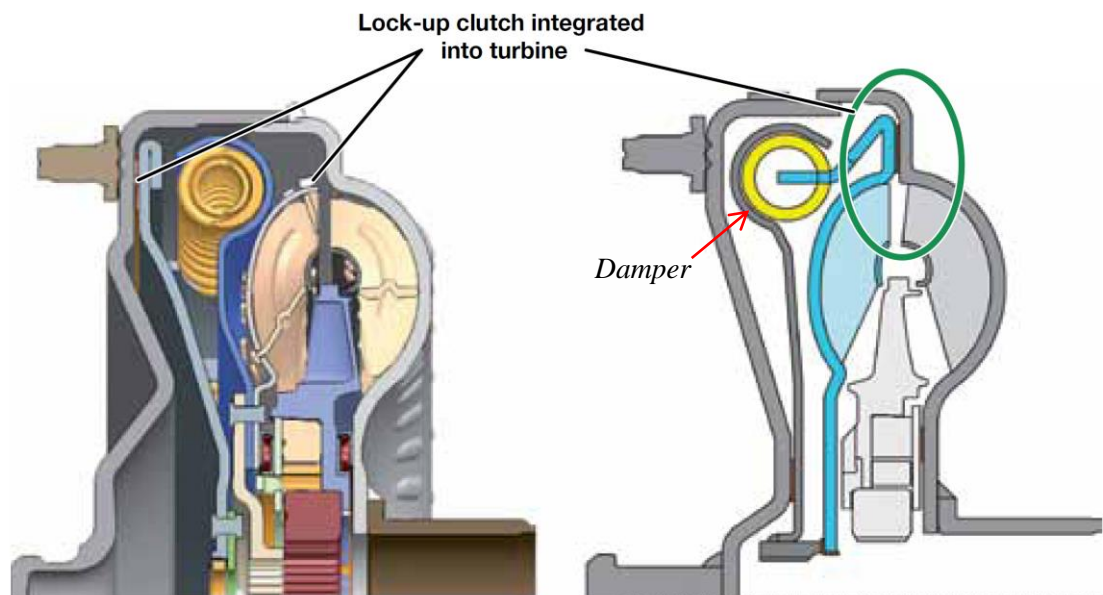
Damper concepts with alternative integrated lock-up clutch and turbine designs where the damper is attached to (L) or forms part of (R) the turbine [27]
